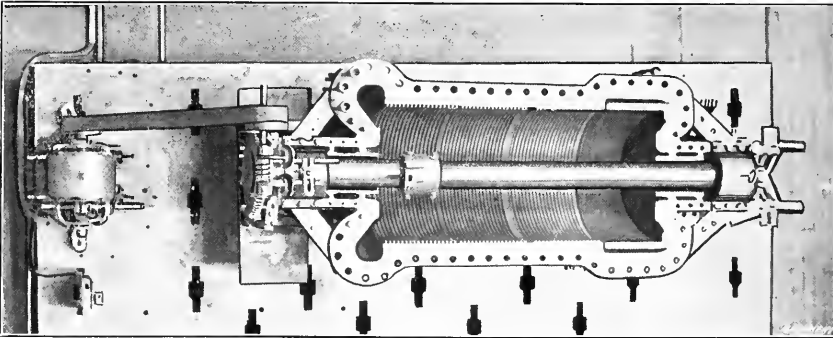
Arrangement of the Boring-bar for machining the Ends of the Blades in the Cases
